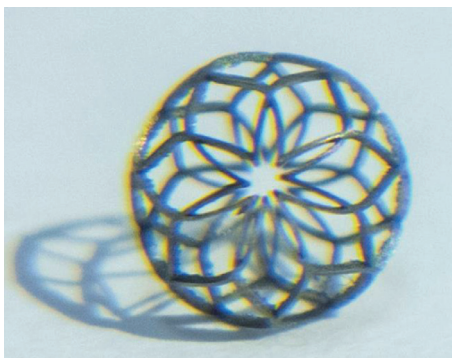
(Color online) Spherical stent prototype after laser cutting and shaping.
